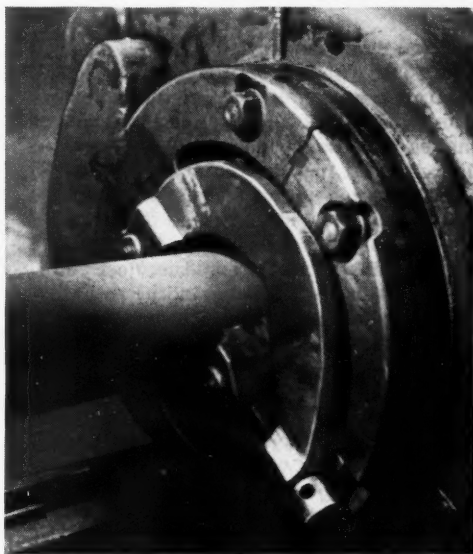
This view shows the sliding jaw upon which the clamp is mounted to hold axles for remachining.
